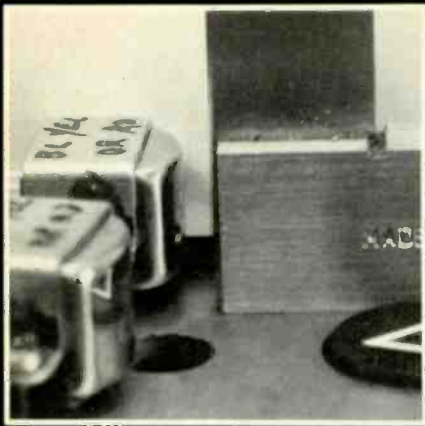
Using the machinist's square to make the play head face perpendicular to the mounting plate.
